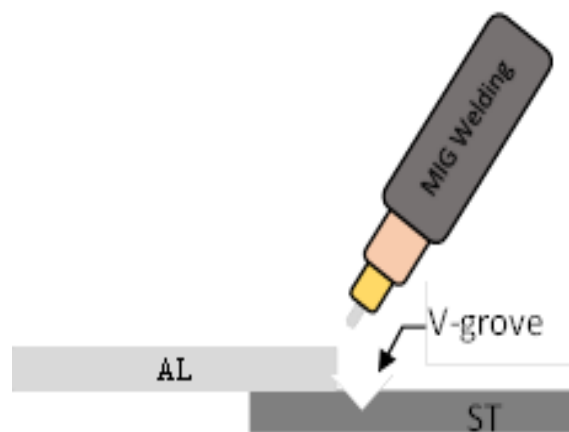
Figure II: Schematic of A6061 aluminum alloy/SUS304 stainless steel by the MIG welding process.
